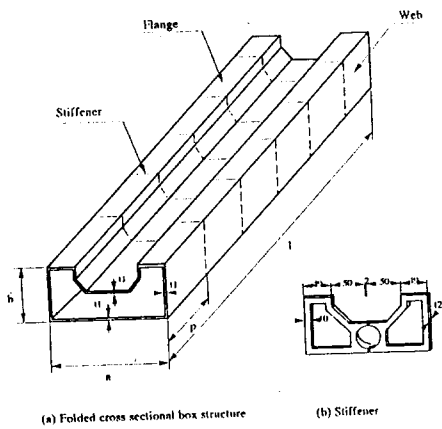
Layout of folded cross sectional box structure with 5 stiffeners
